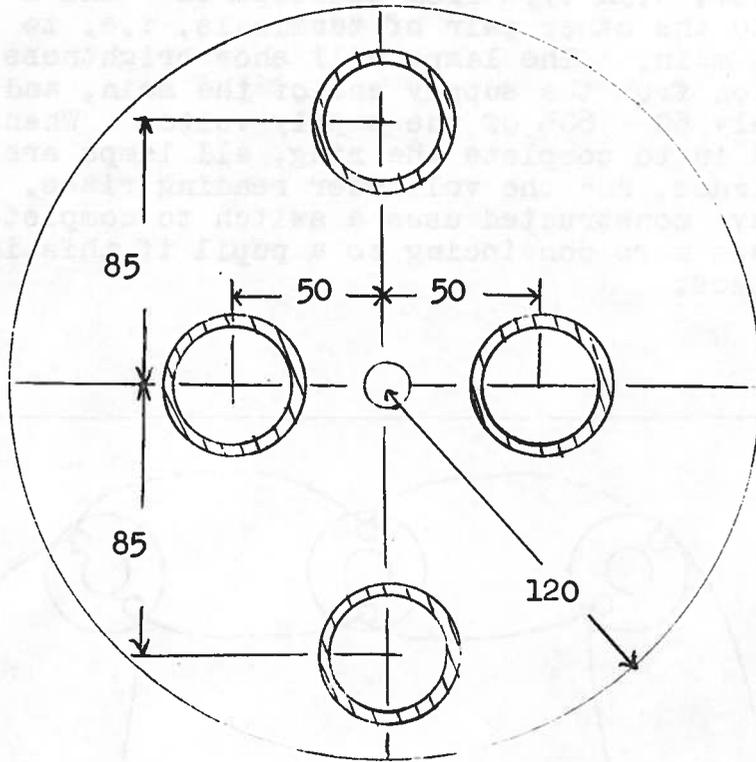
Plan view of turntable, showing location of ring magnets. Dimensions in mm.
